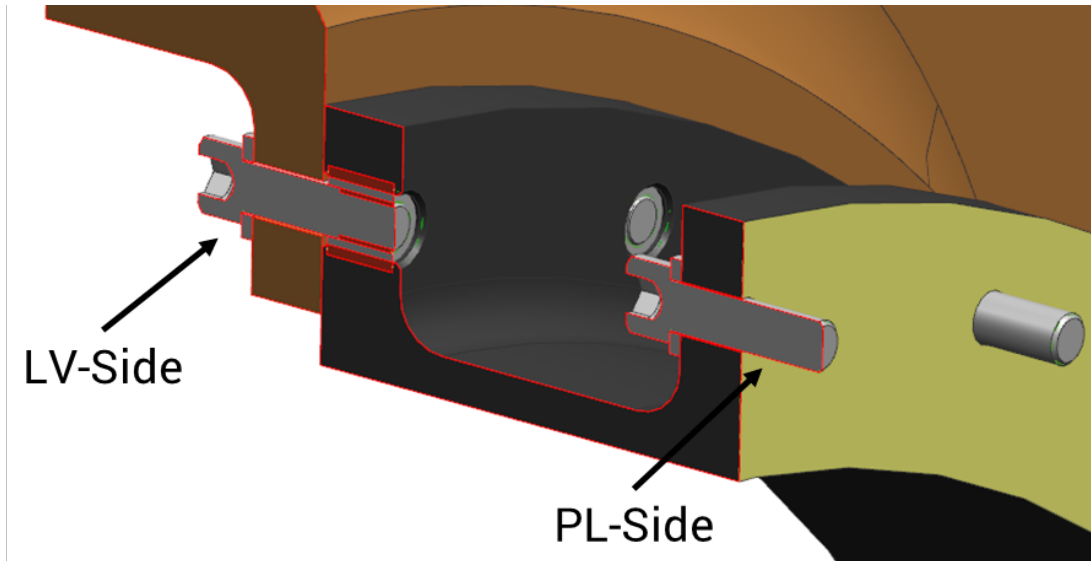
Mechanical Interface Ring (Inserts) Assembly to Launch Vehicle Hardware
